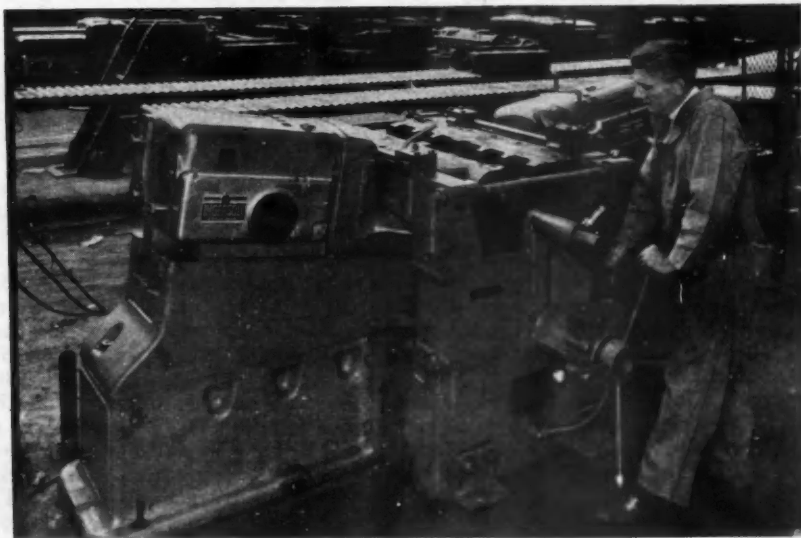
Two-way, twelve-spindle machine head, in very close quarters, works on both sides of the valve tappet holes counterboring in opposite directions.
